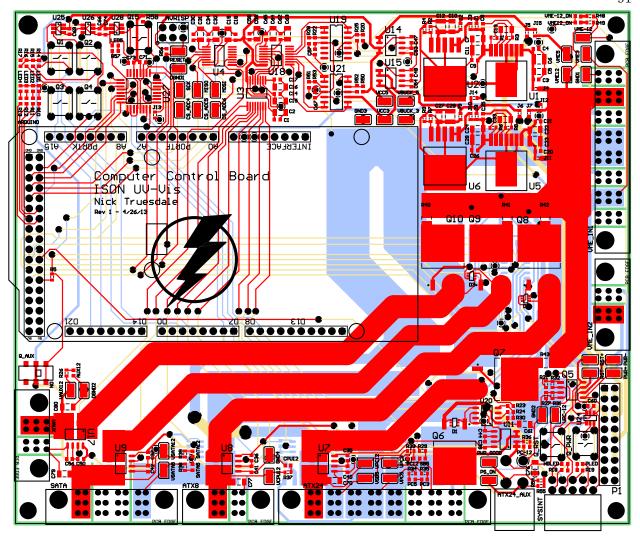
This view of the Computer Power Board, with the top layer in red and the bottom in blue, shows the clustering of logical circuits at top and bottom-right, with the rest of the board holding MOSFETs, sensors and thick power traces.
